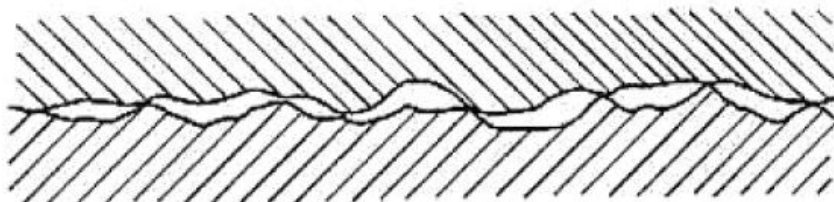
Microscopic View of Surfaces Between Bolt Head and Plate [24]
